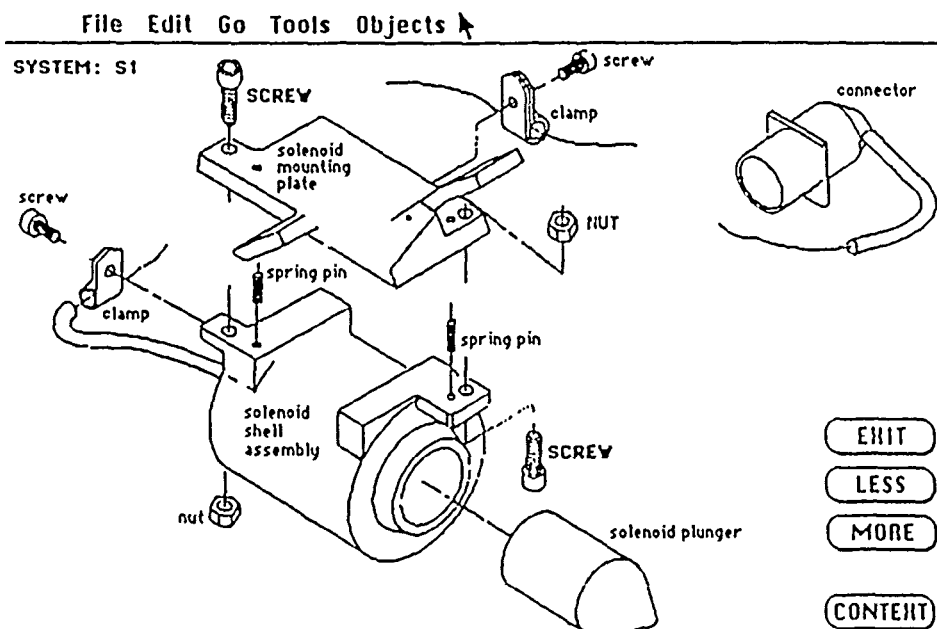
Clearing Solenoid Assembly: Third-Order Fisheye View.
